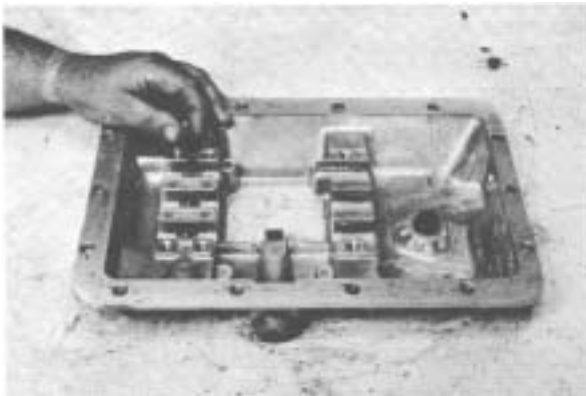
Remove mesh lock spring and lock ball - 3 each. Remove crossover interlock balls - 4 each.
